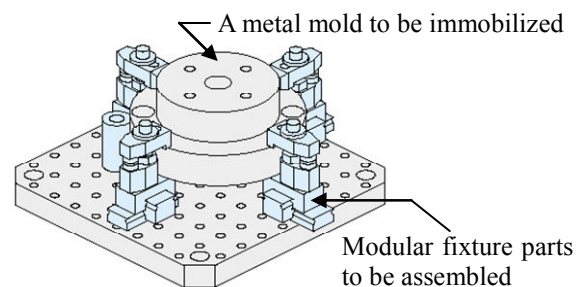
Assembly drawing of a metal mold and modular fixture parts.
